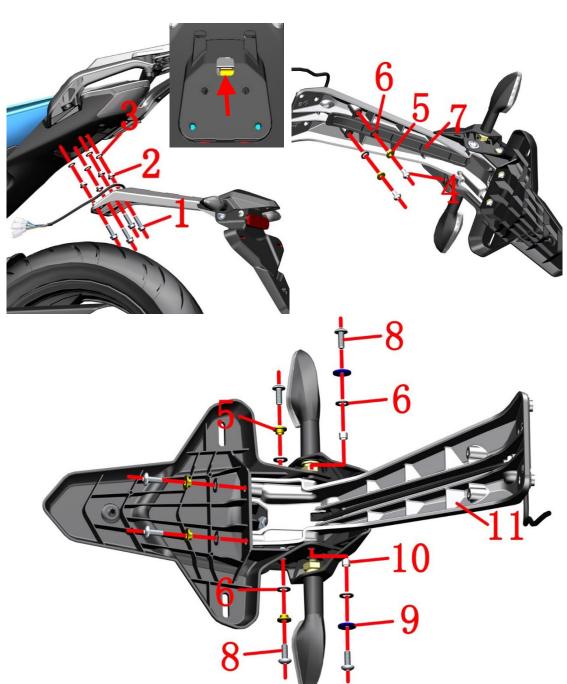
REAR COVER COMPONENT		Rear mud board component 1	CHK	(0)
